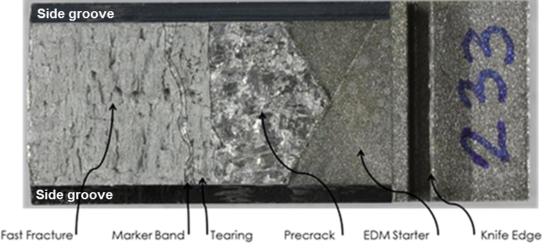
Photomicrograph of Fracture Surface of L-T Fracture Specimen from Coupon Blank M2
